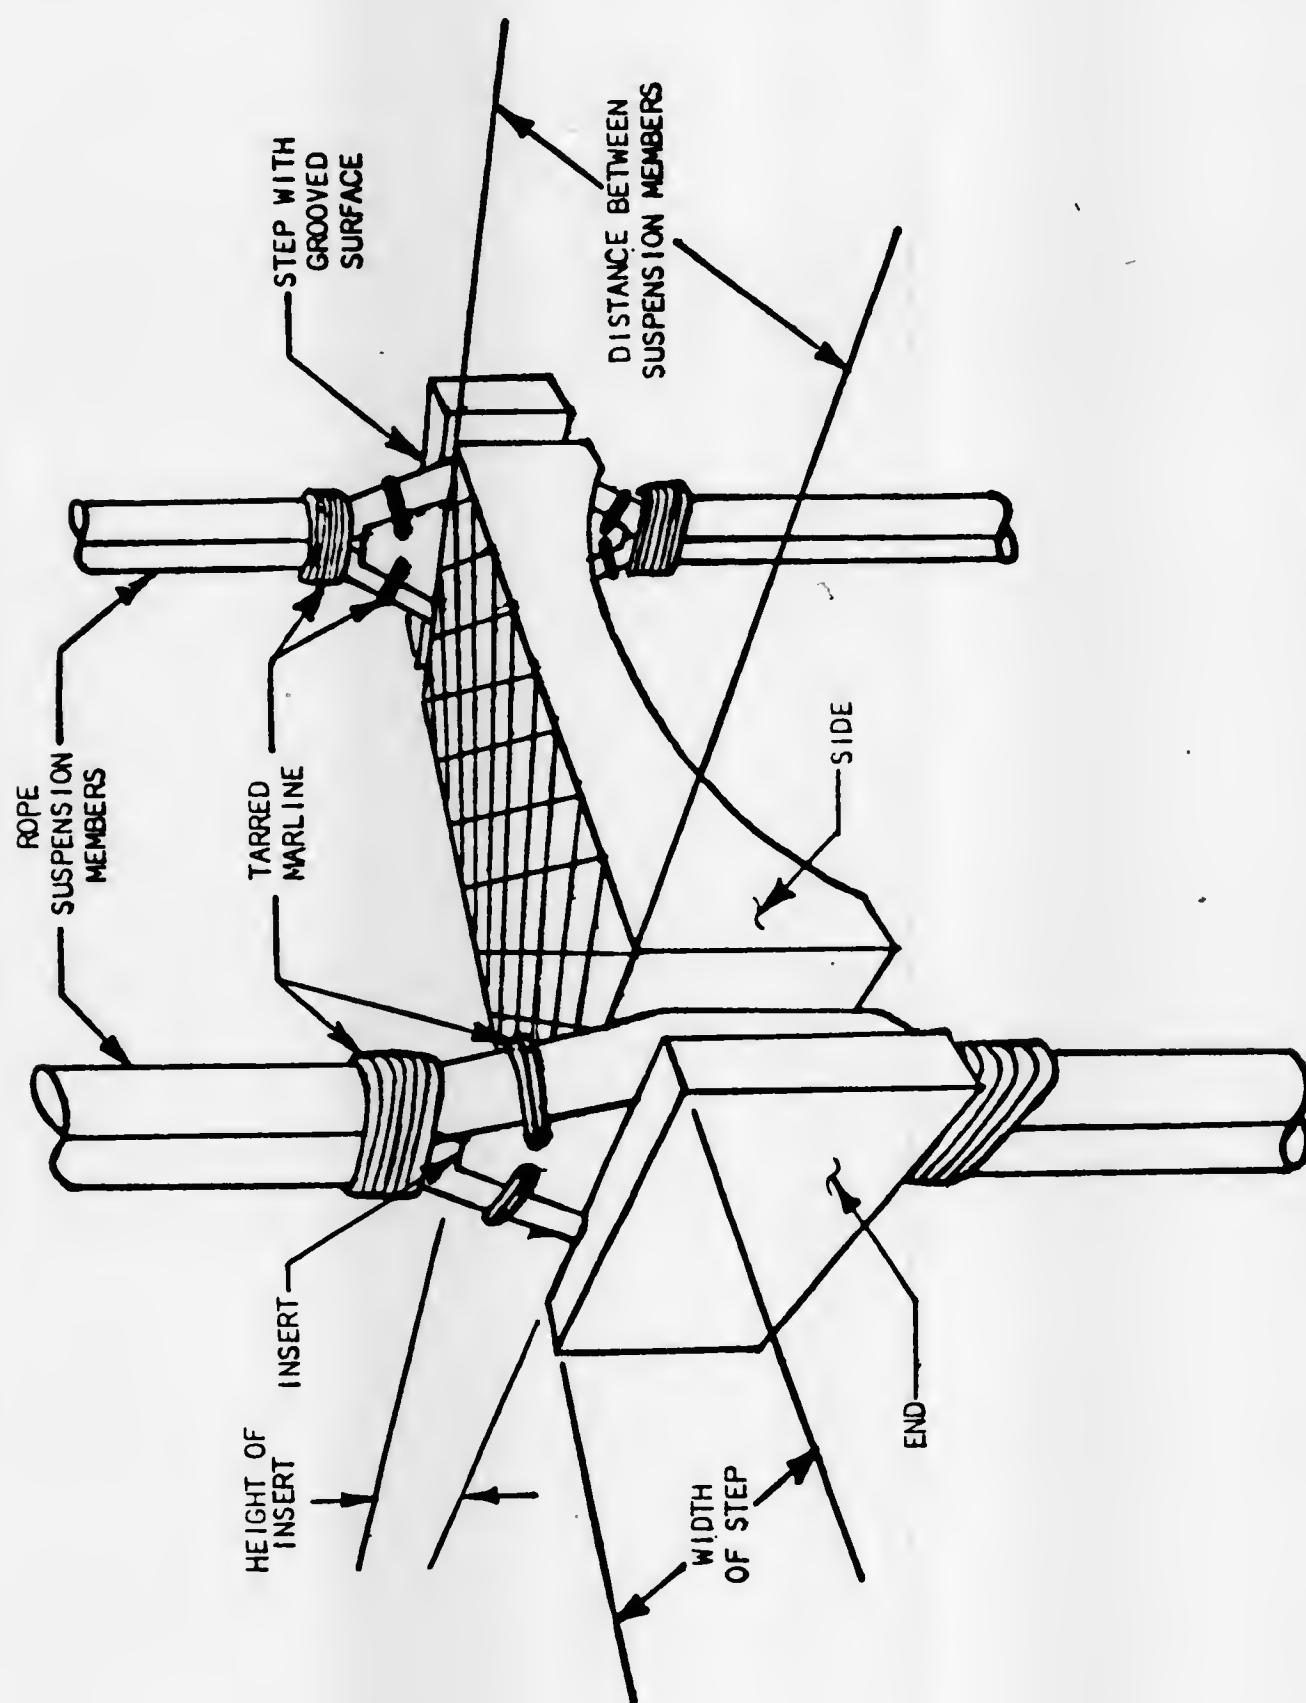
(a) (2). TYPICAL PILOT LADDER STEP DETAIL
